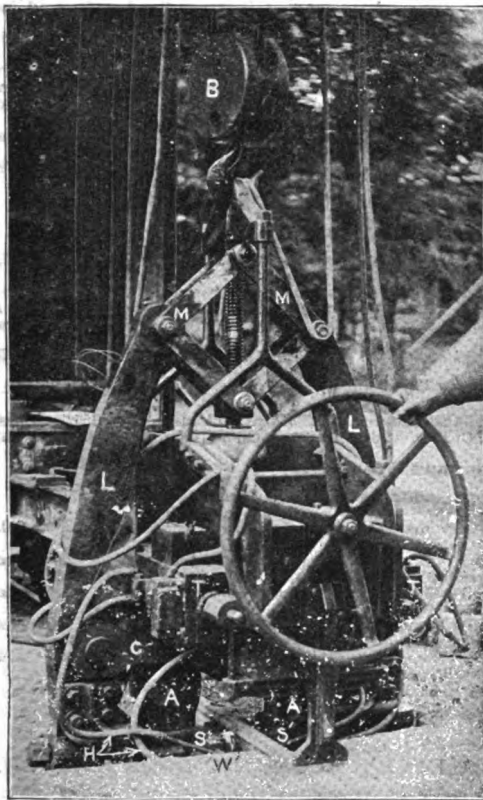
ELECTRIC RAIL WELDING MACHINE.
